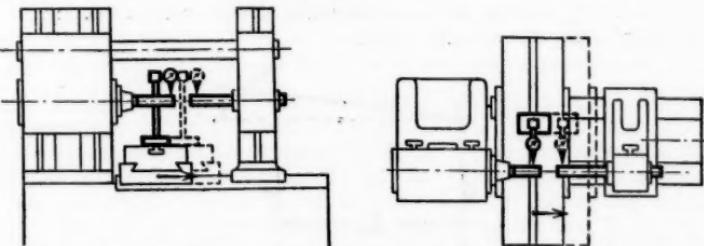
, b.—Double mandrel method from common plane (milling machine).
